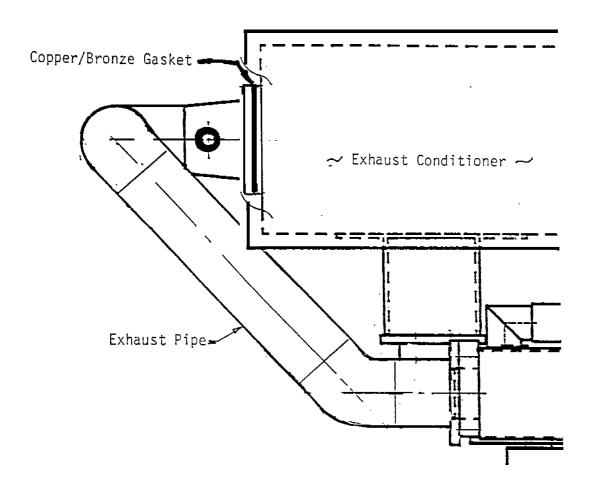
Gasket Between Exhaust Pipe and the Flange of the Exhaust Conditioner
